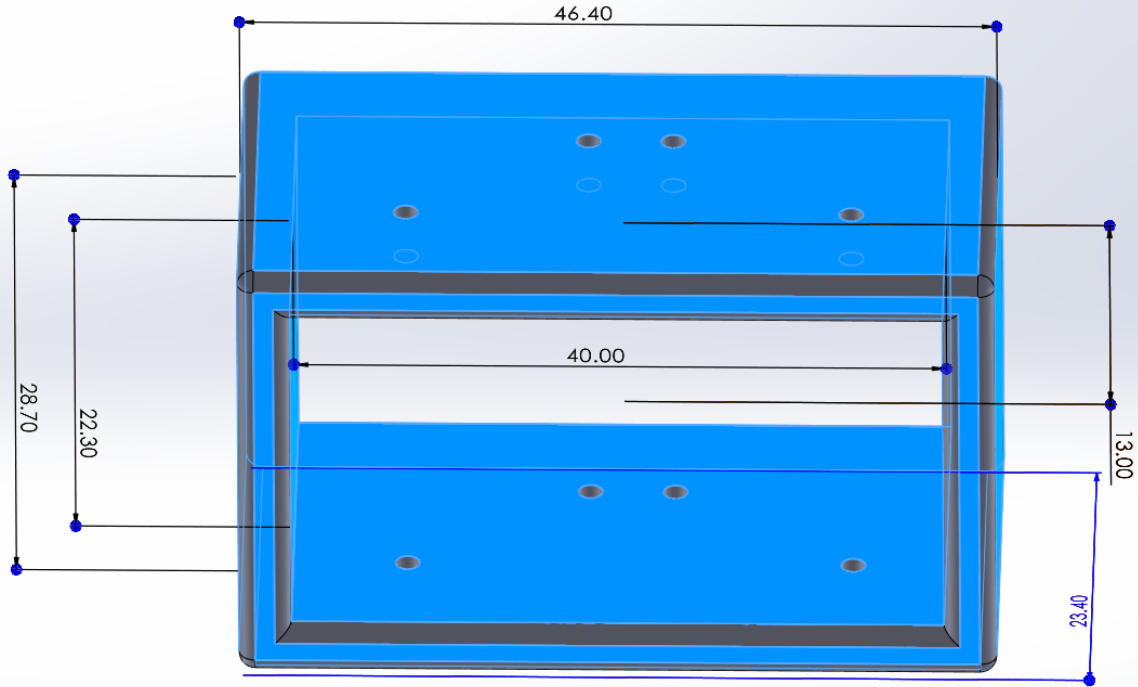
CAD drawing of Prototype 3, showing the overall dimension of the prototype. The outer dimension is 46.4 mm × 23.4 mm × 28.7 mm (Width × Length × Height), and inner cross-sectional area is 40.0 mm × 22.3 mm (Width × Height). Unit in mm.
